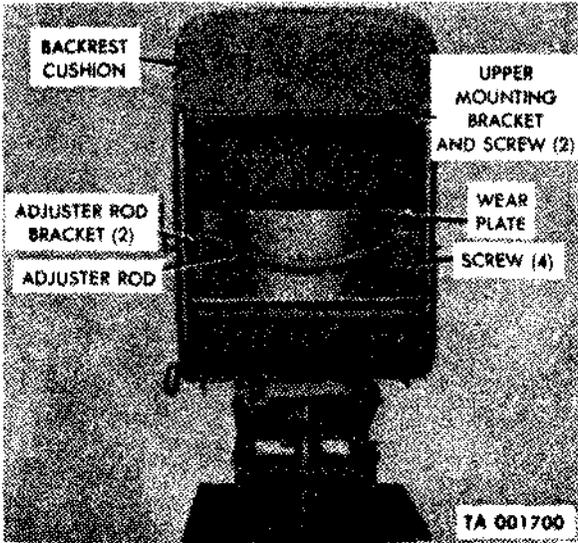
Driver's seat backrest cushion removal and installation
